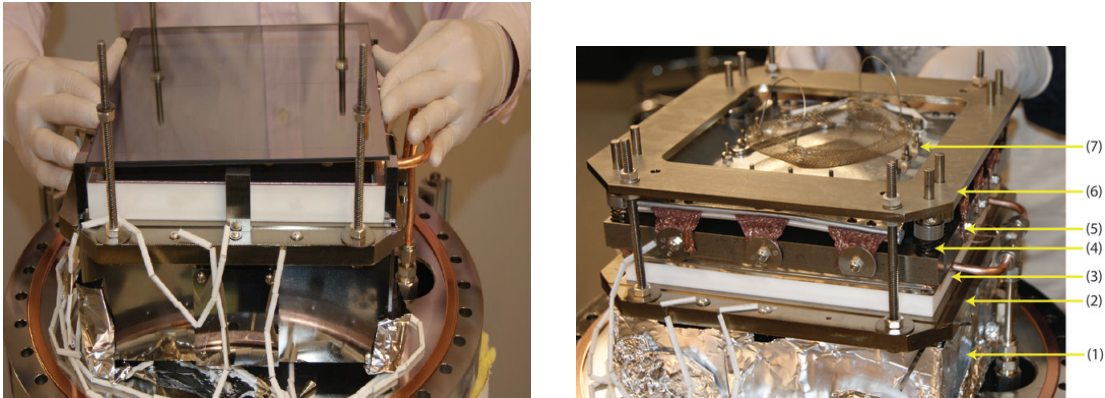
Left: Air-transfer pre-assembly. A window with pre-deposited Sb layer is placed on to the lower tile assembly with MCPs and anode. Right: An assembled tile clamped in place in the compression fixture prior to sealing. Heaters above and below the tile couple to the top and bottom fixture plates. The indicated components are: (1) the lower NiCr heater assembly; (2) the bottom compression fixture plate; (3) the tile assembly; (4) the compression mechanism; (5) floating rigid press bars; (6) the upper compression fixture plate; and (7) the upper NiCr heater assembly.
